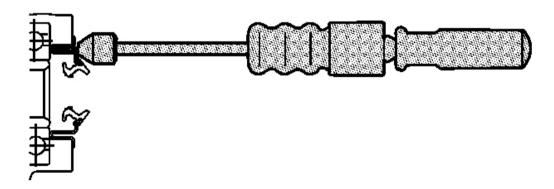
Axle Seal & SA9133T Courtesy of GENERAL MOTORS CORP.
